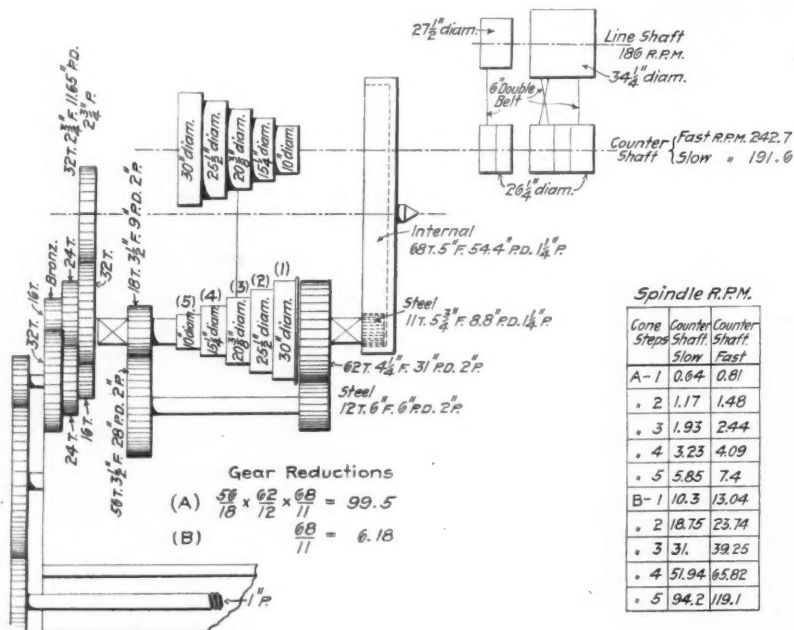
Diagram of Driving Mechanism of 60-in. Engine Lathe, Belt Driven.
